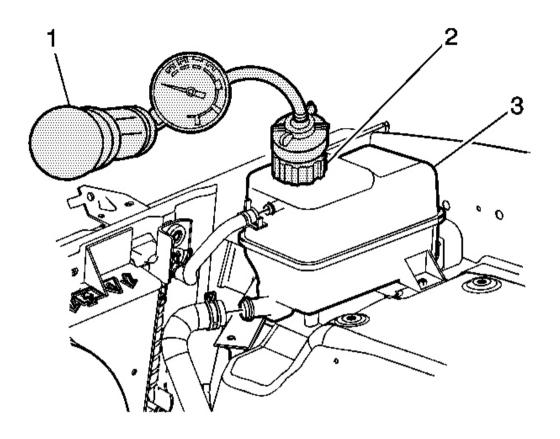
Using J 24460-01 With J42401 To Apply Pressure To Cooling System Courtesy of GENERAL MOTORS CORP.
